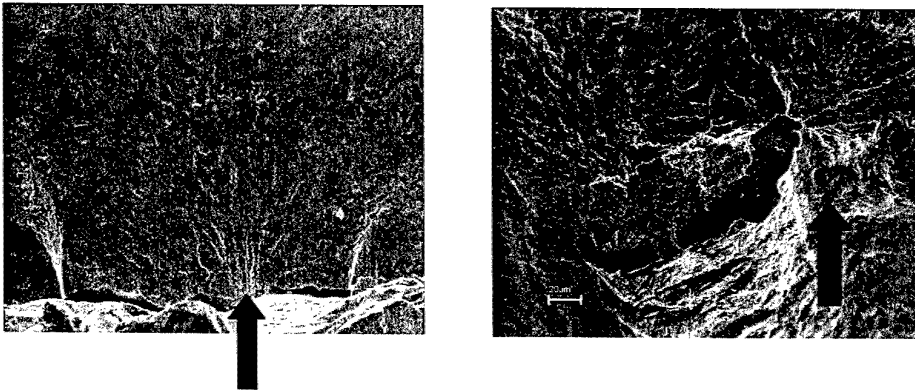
Scanning electron microscopic images of 7050 aluminium alloy fracture surface tested in fatigue (FT55+5M) loading, fracture origin (lap) marked by an arrow
